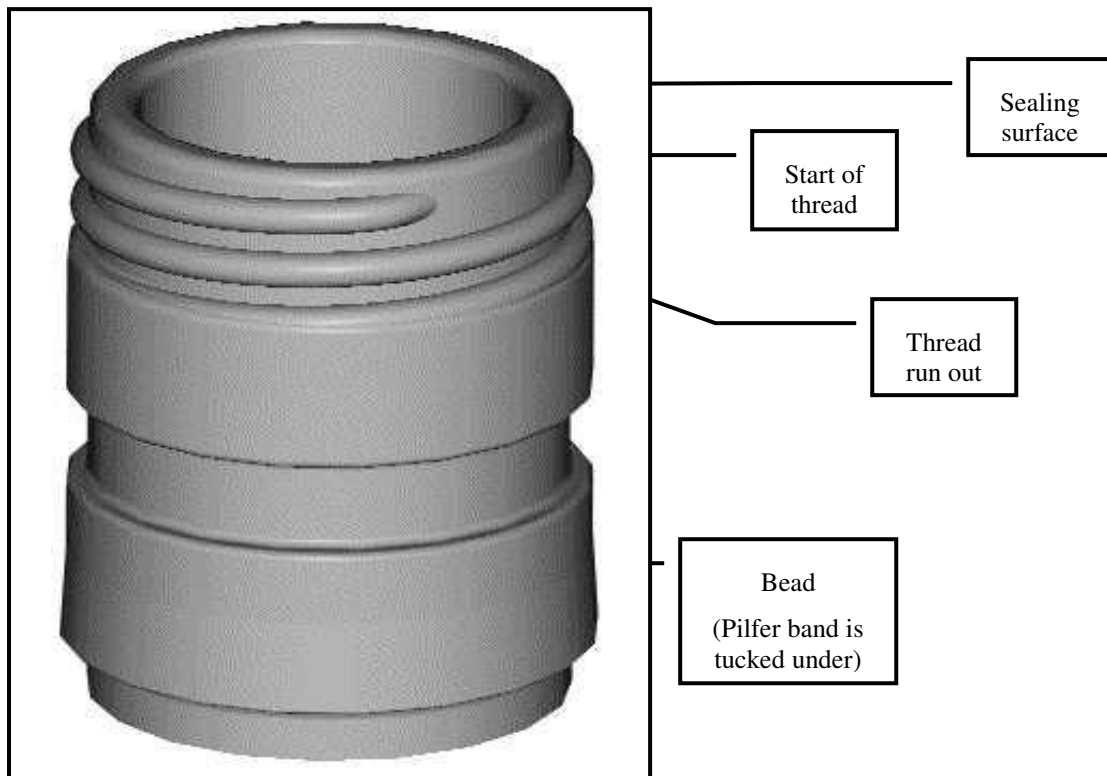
a picture showing the drawing of the industry standard GF305 thread finish used in the FEA modelling and modelled as a rigid body.
